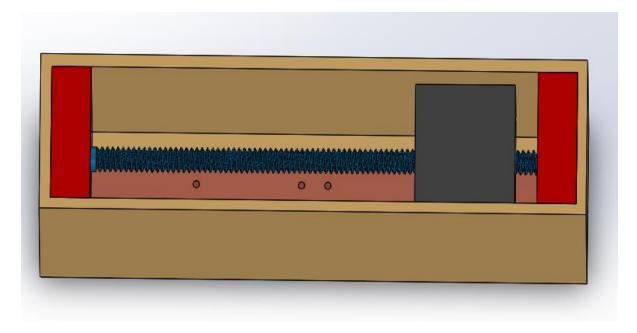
FINAL ASSEMBLY OF HORIZONTAL AXIS
